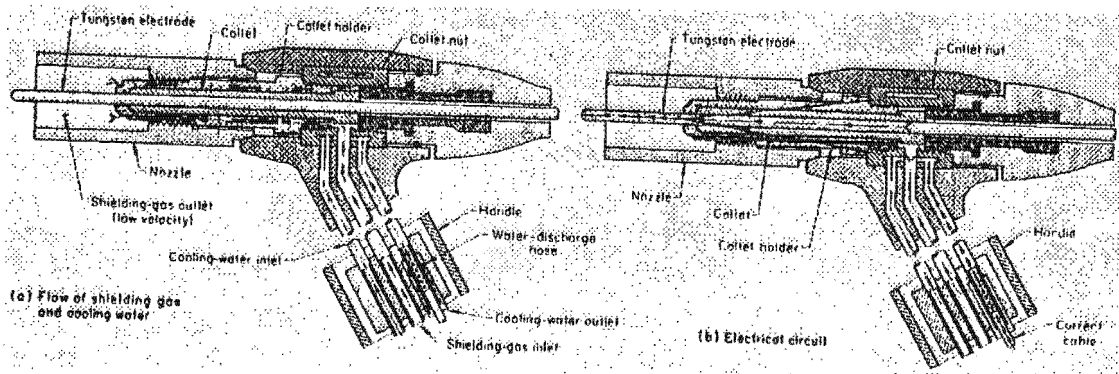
Cross-sectional view of a manual TIG welding torch. (a) flow of shielding gas, flow of cooling water and, (b) electrical circuit
